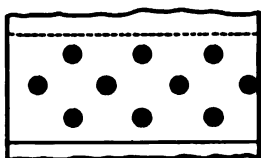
Treble-riveted lap-joint zigzag-riveted.
